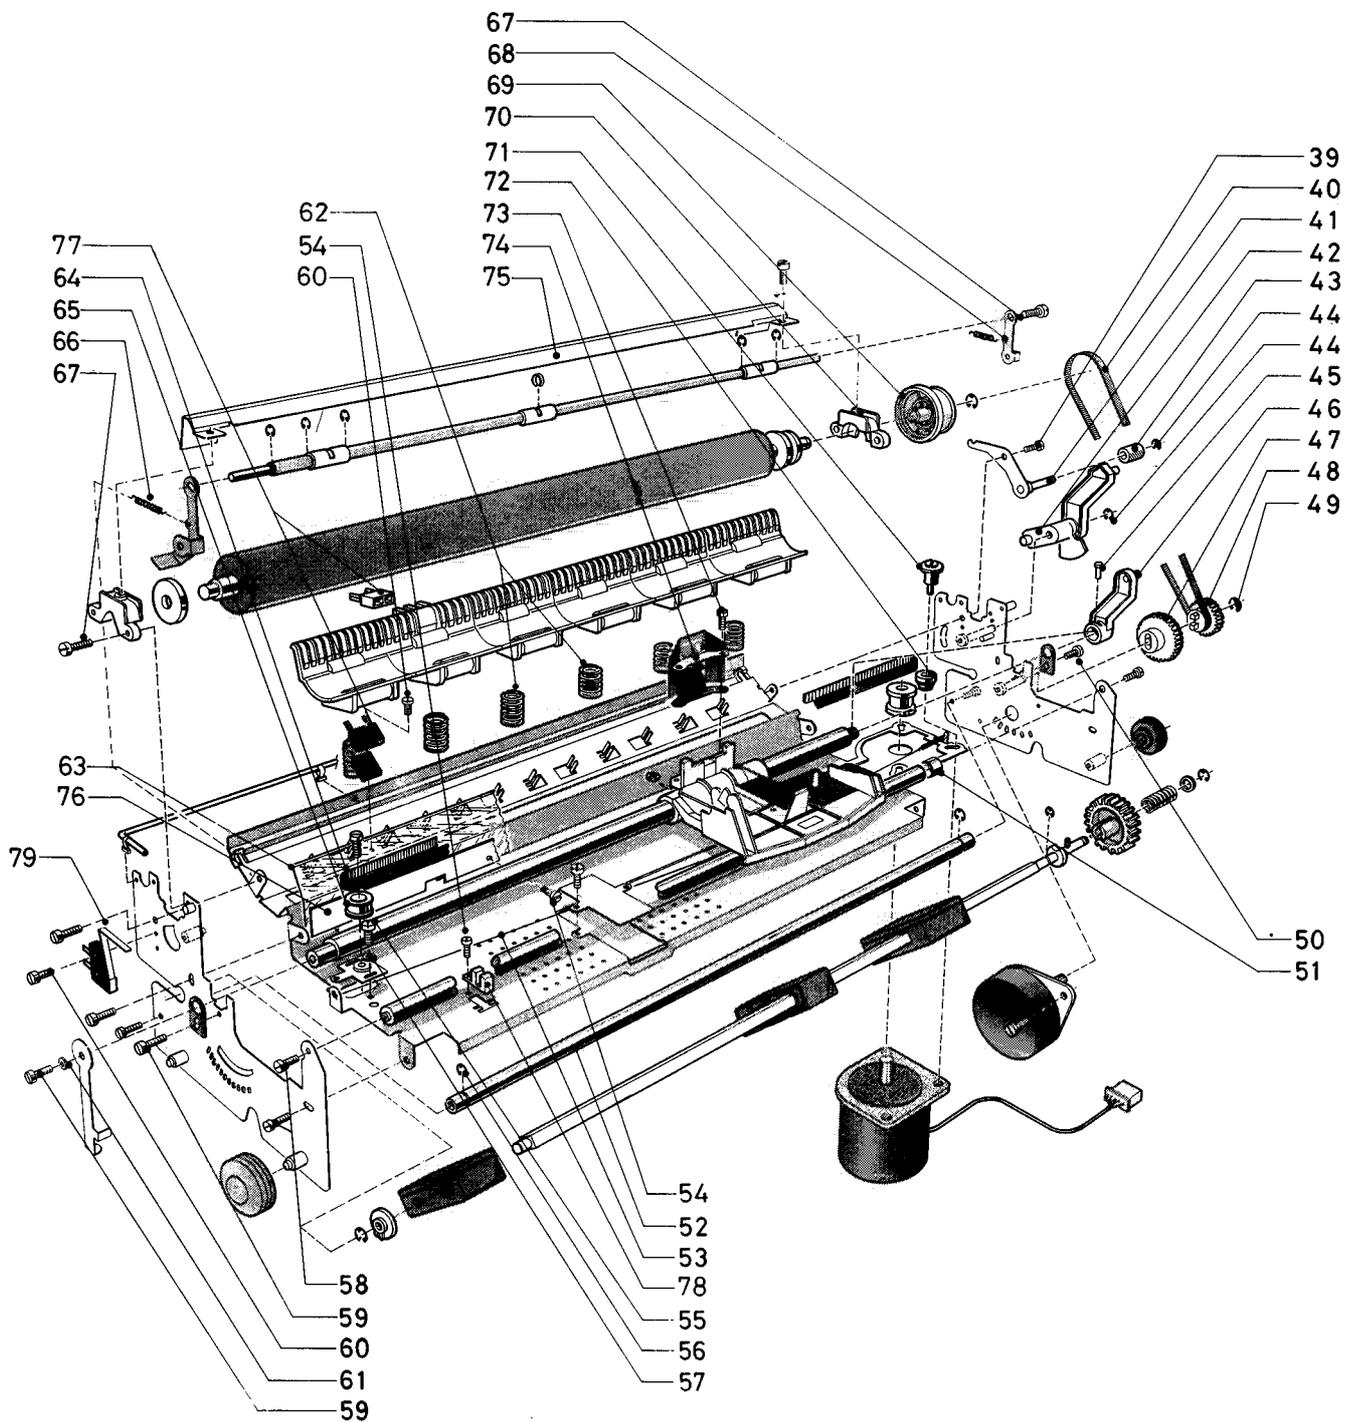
(cont.). 4/41 Basic Assembly Mechanism
